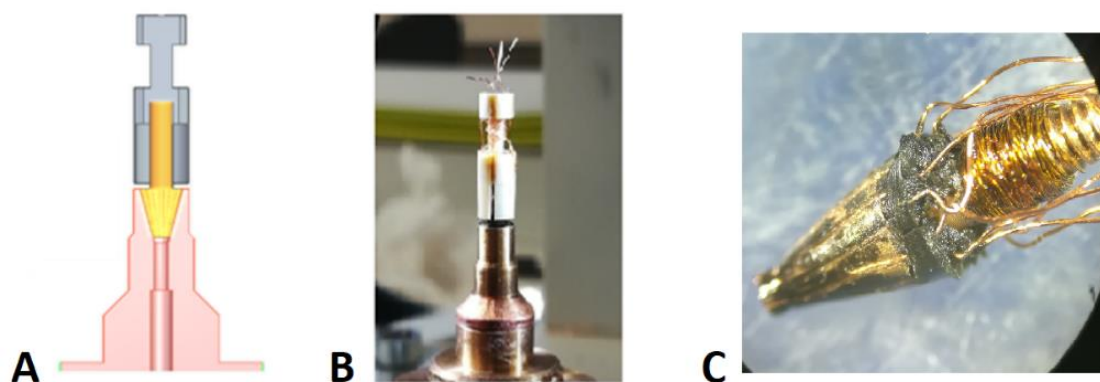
The assembly of small parts. With: A – a cross-section of geometry from CAD, B – the real-life image with all wiring & C – the ejected cone knob. Parts are coloured: feedthrough plug is pink; cone knob is yellow and the sample table is grey. Dimensions of parts can be found in Appendix A.
